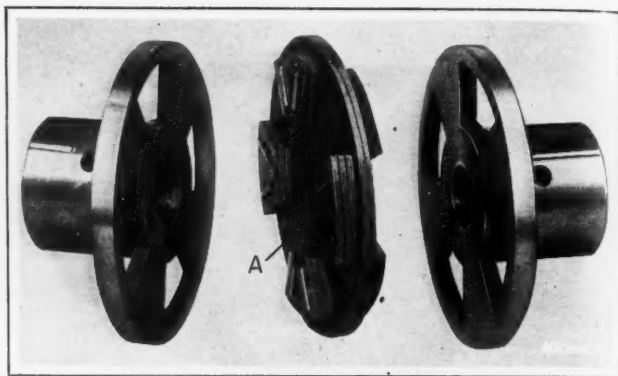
Coupling provided with Perforated Flanges which Interlock with a Leather Disk
